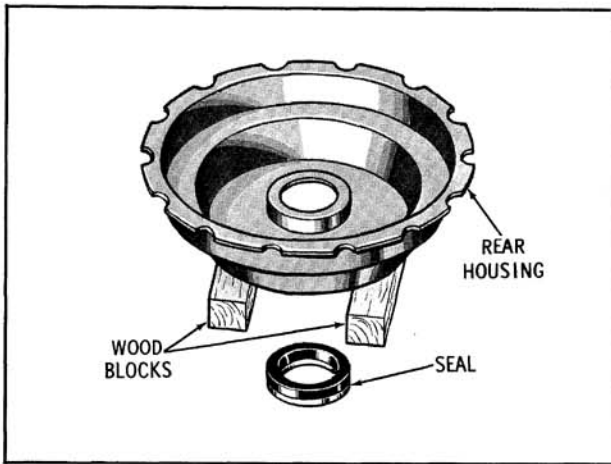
Removal of Bearing Seal from Rear Housing
